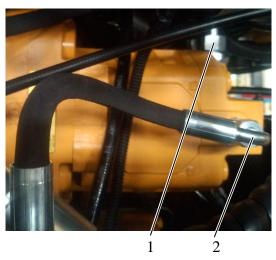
1 Oil return pipe of pilot pump 2 Oil outlet pipe of pilot pump
